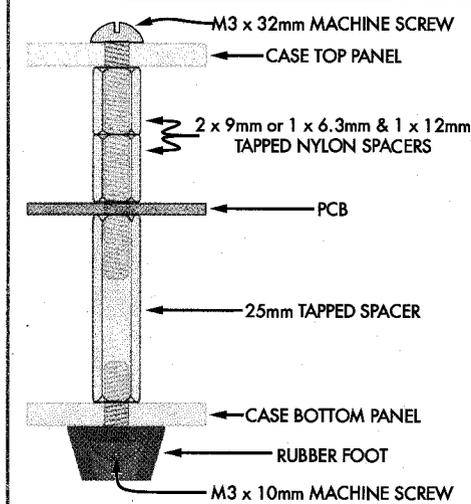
the top panel, bottom panel and PCB are sandwiched together using four sets of machine screws and tapped spacers. This spaces the top and bottom panels the correct distance apart for the front, back and side panels to fit. If they're too close together, add 3mm inner diameter washers in each stack as shims.
